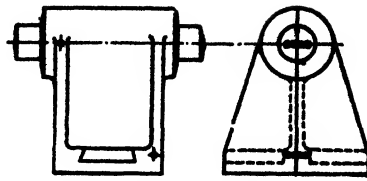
Machine Frame Pattern with Slots for Loose Pieces.
